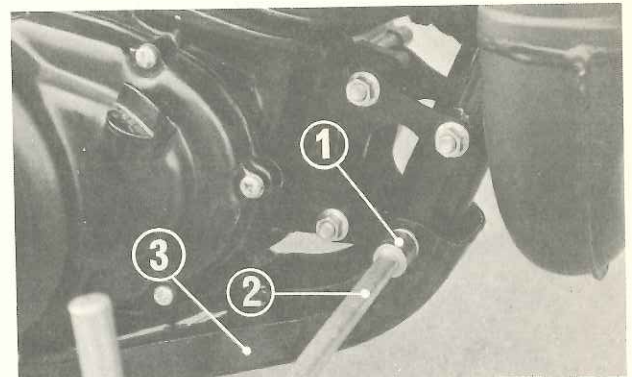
(1) 10 mm nuts (2) 10 mm box wrench (3) Skid plate
